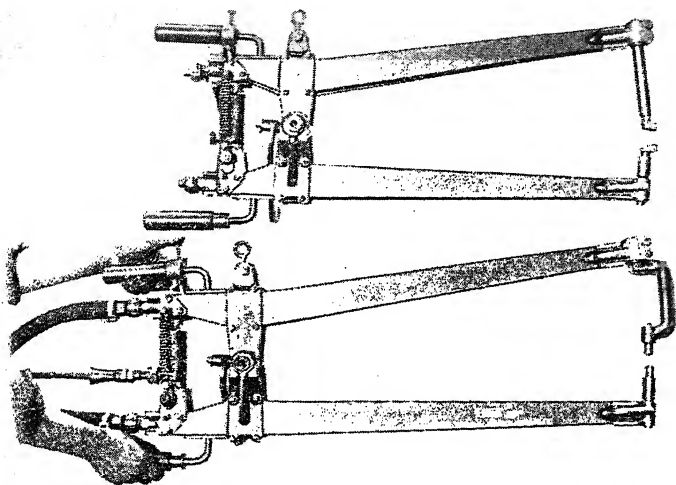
LONG PINCERS FOR SCIAKY METHOD OF SPOT WELDING HULLS, FUSELAGES, ETC.
